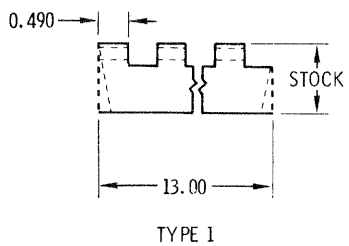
Part Number 369A2001-11 Seal, Strut Assembly.
